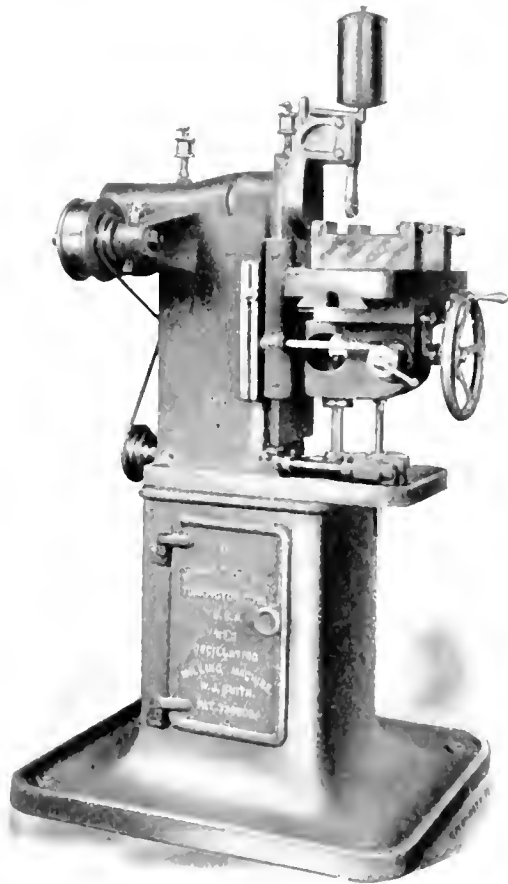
Milling Machine Specially Designed to Operate on the Oscillating Principle.
